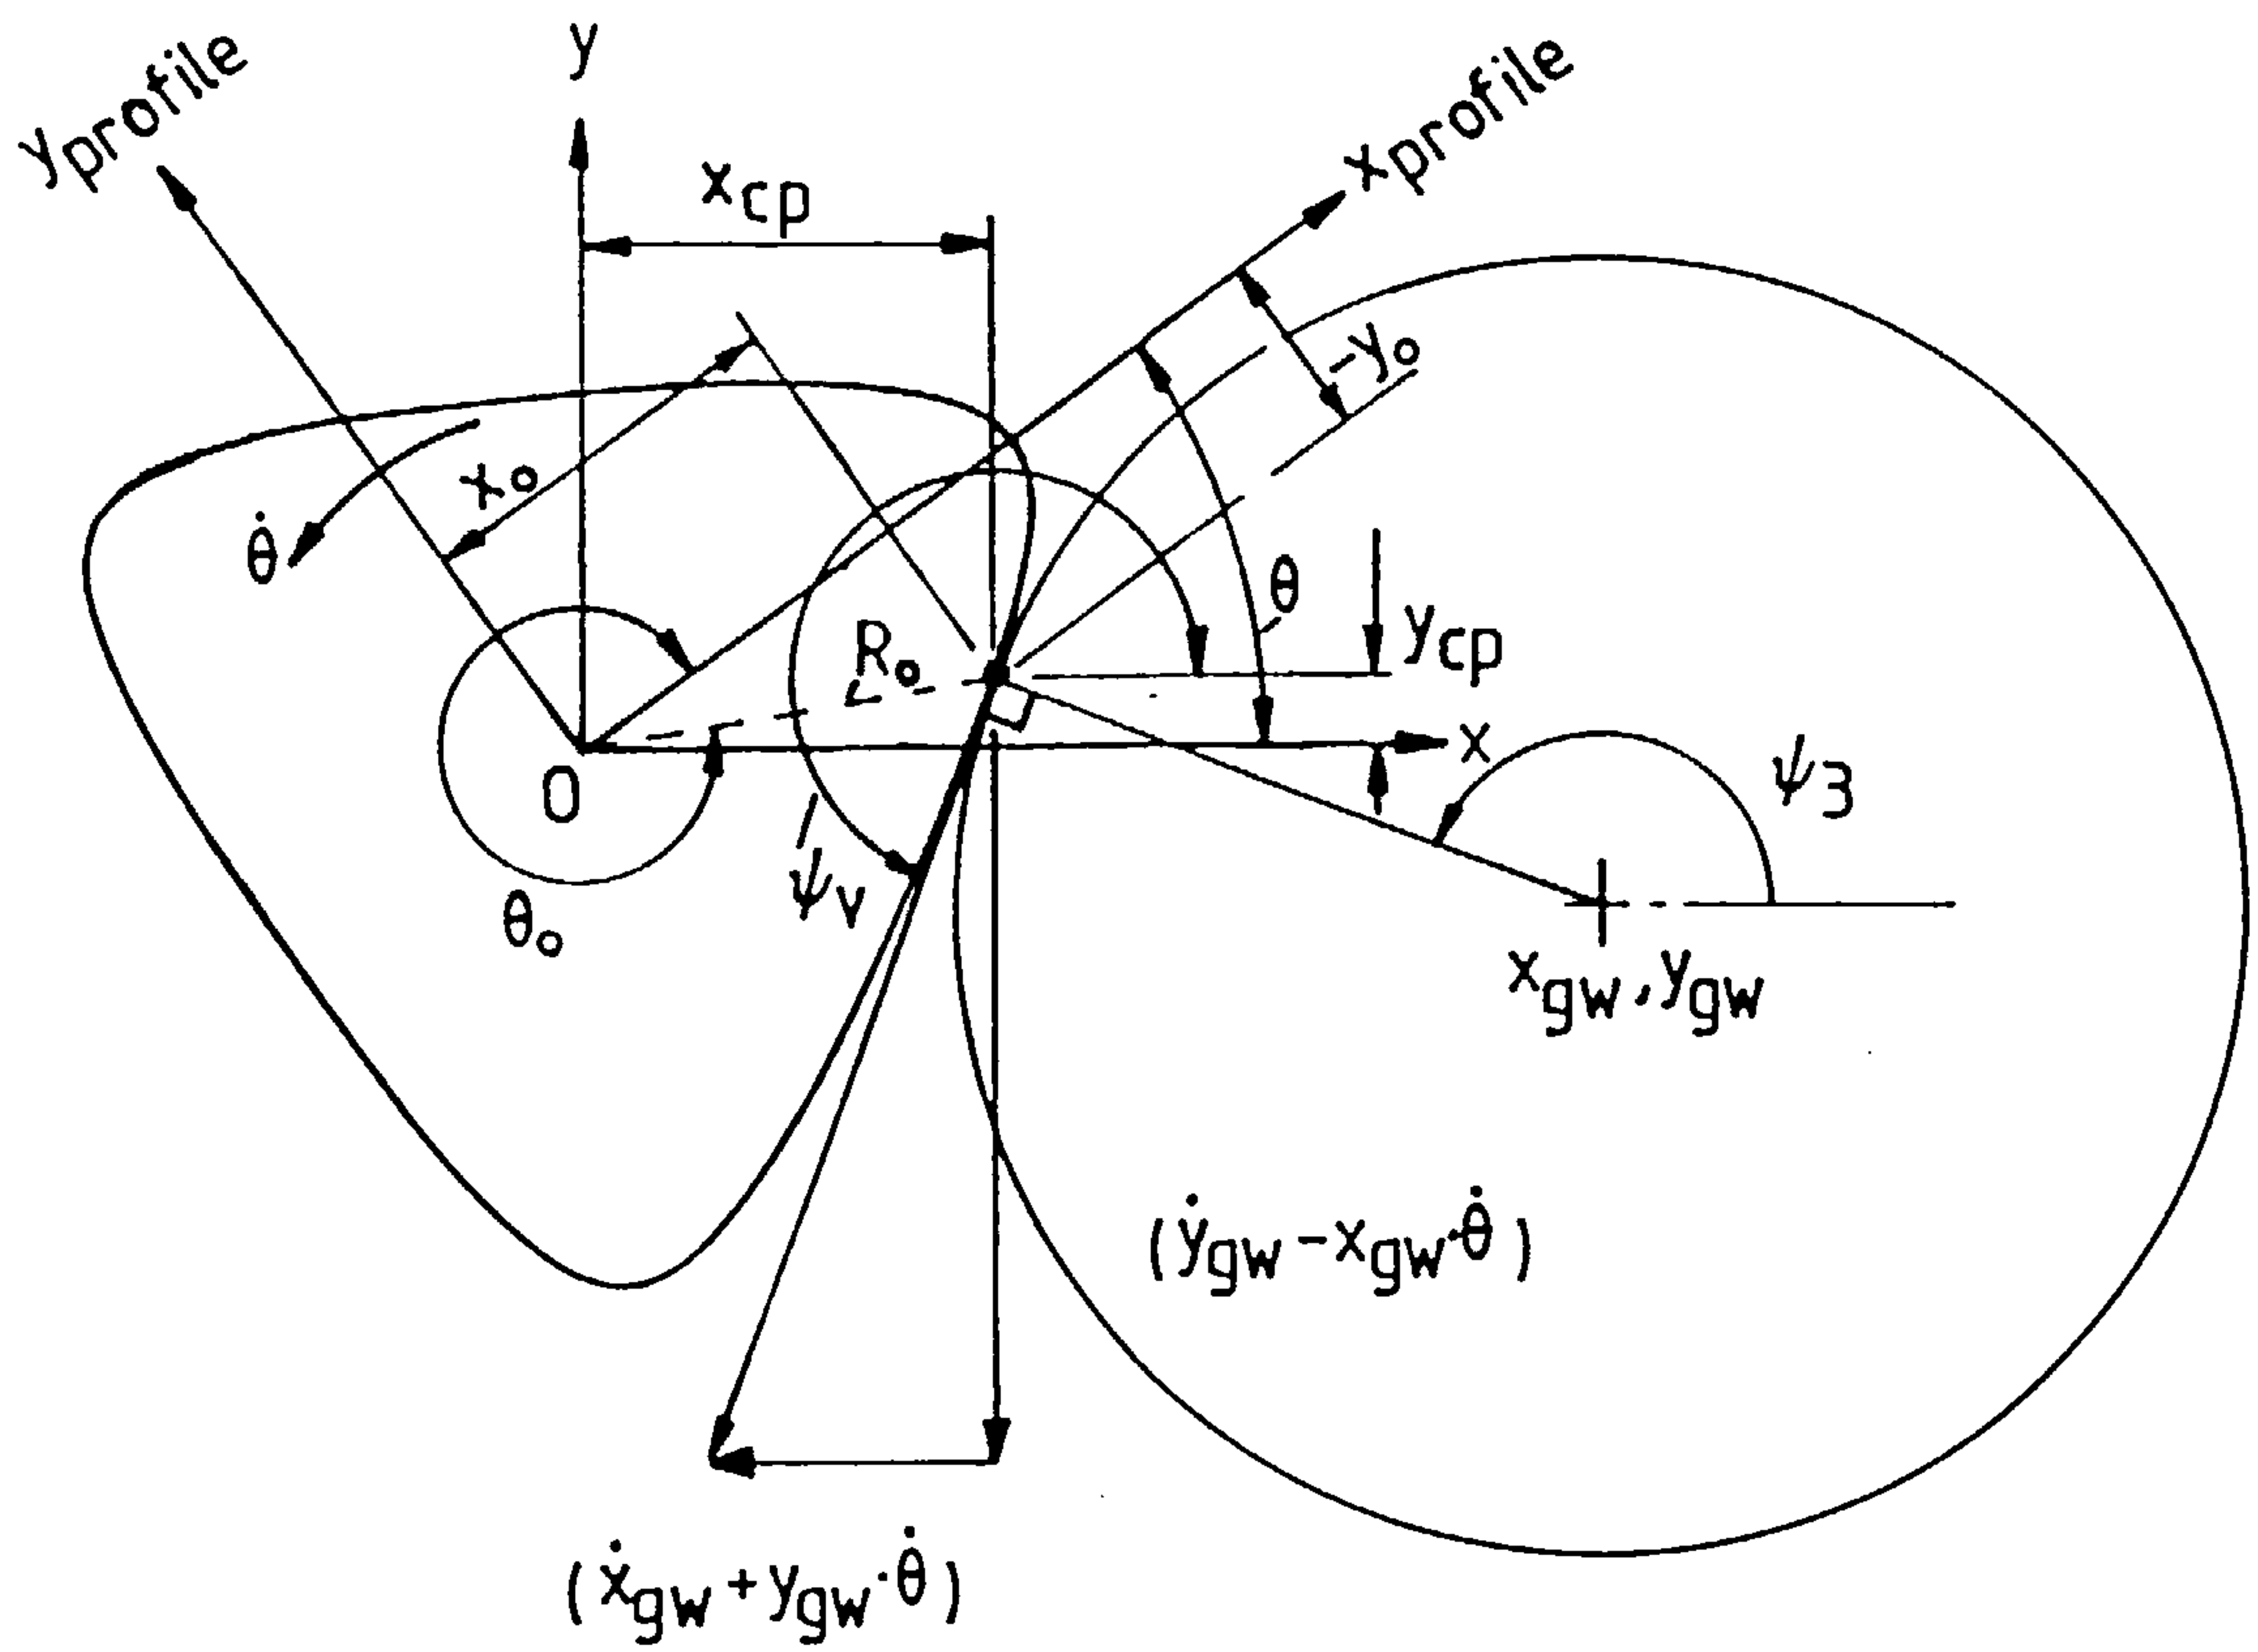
Relative motion of grinding wheel and workpiece.
